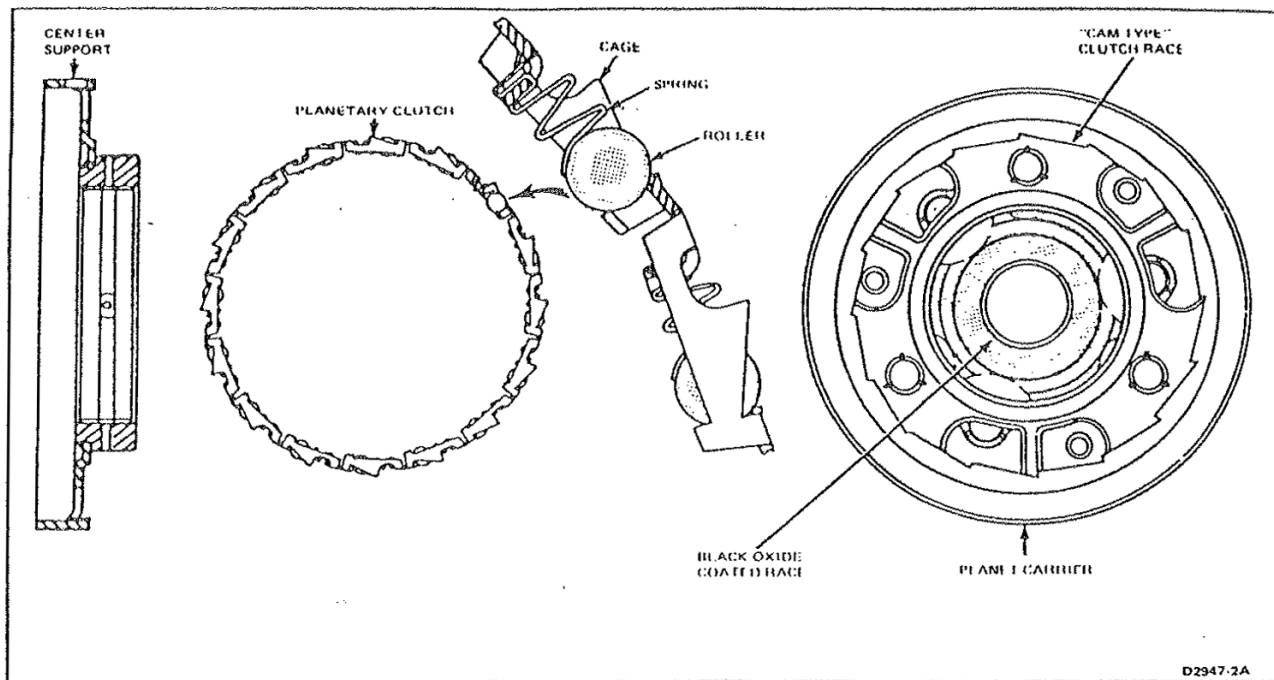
Roller Type Planetary Clutch, Carrier and Center Support-
